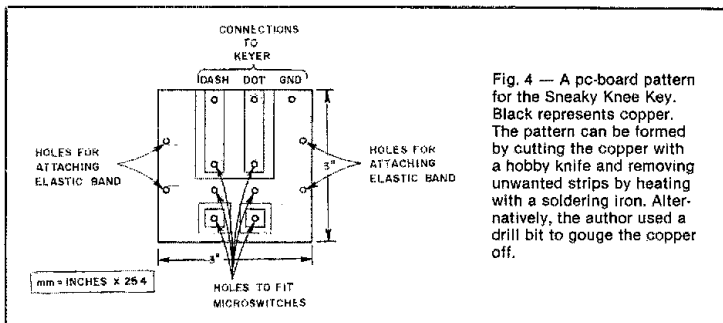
A pc-board pattern for the Sneaky Knee Key. Black represents copper. The pattern can be formed by cutting the copper with a hobby knife and removing unwanted strips by heating with a soldering iron. Alternatively, the author used a drill bit to gouge the copper off.
